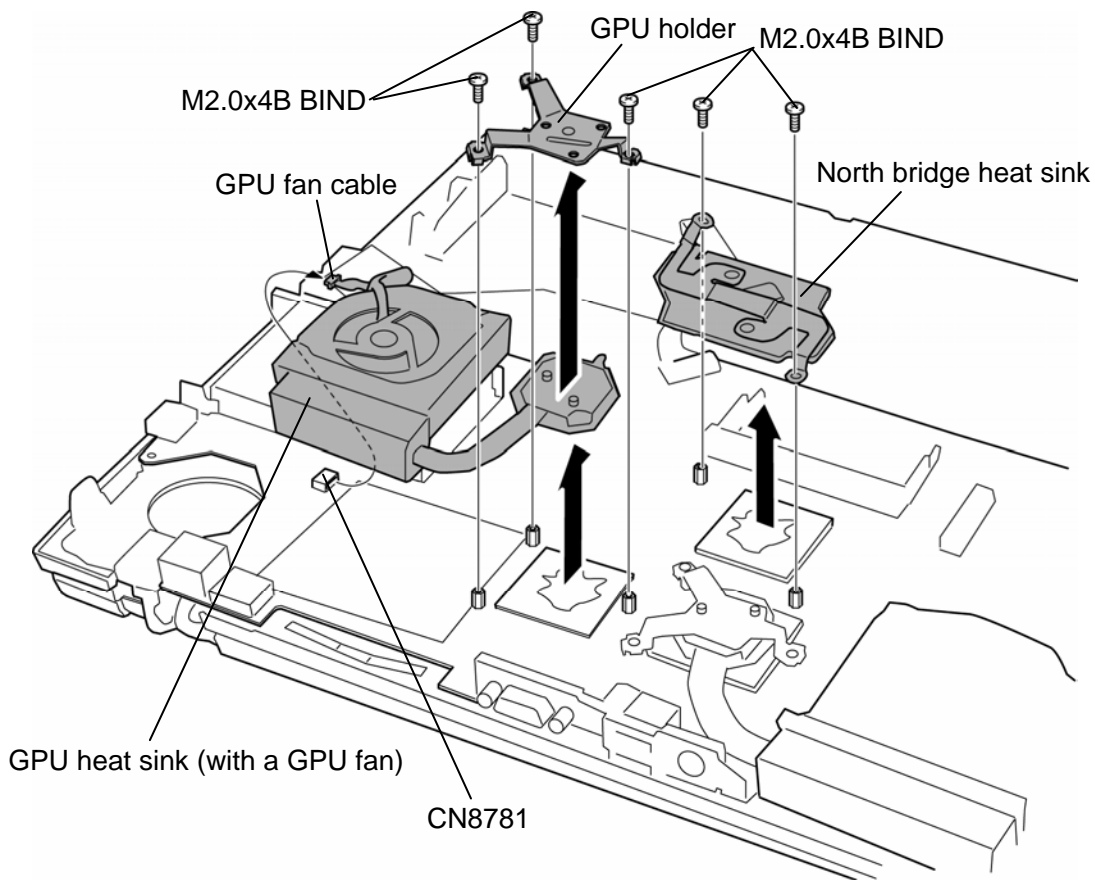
Removing the GPU heat sink/North bridge heat sink
